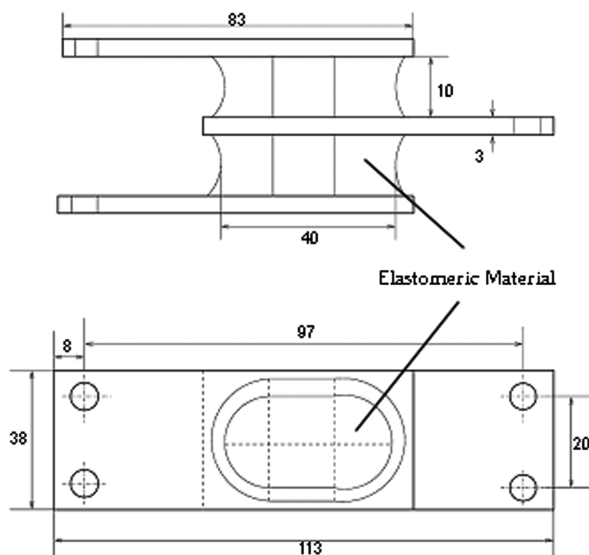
Schematic of the elastomeric double-lap-shear specimen (dimensions in millimeters).
